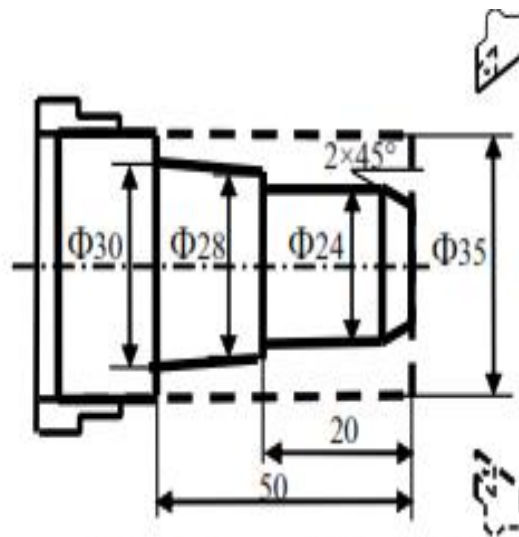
Internal Diameter/Outer Diameter Cutting Cycle – Example 3
